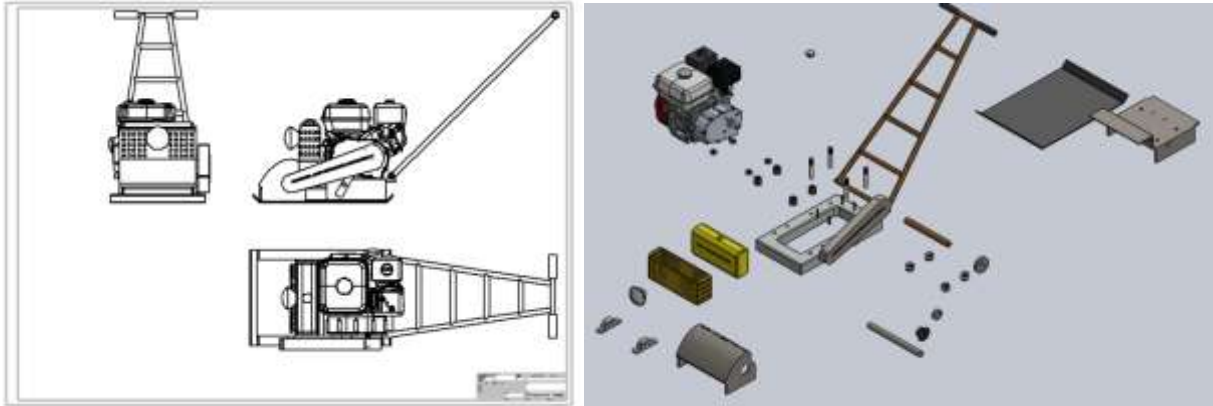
The orthogonal array of the machine, and exploded view of the unassembled machine parts.
